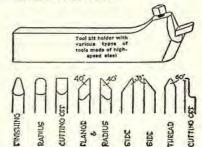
A tool bit-holder and a set of high-speed lathe tools. Excellent for repairshop purposes. They cover a great variety of work. Tool should be changed to suit the work, rather than regrinding tool each time.
